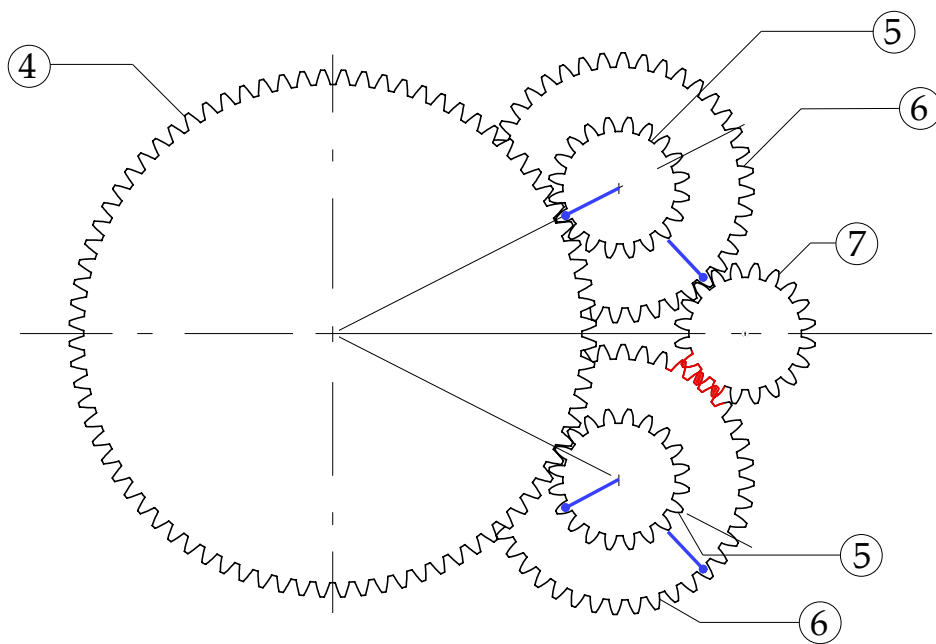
Reference positioning of second and third gear stages. Both intermediate pinion and gear are positioned exactly on the same orientation.
